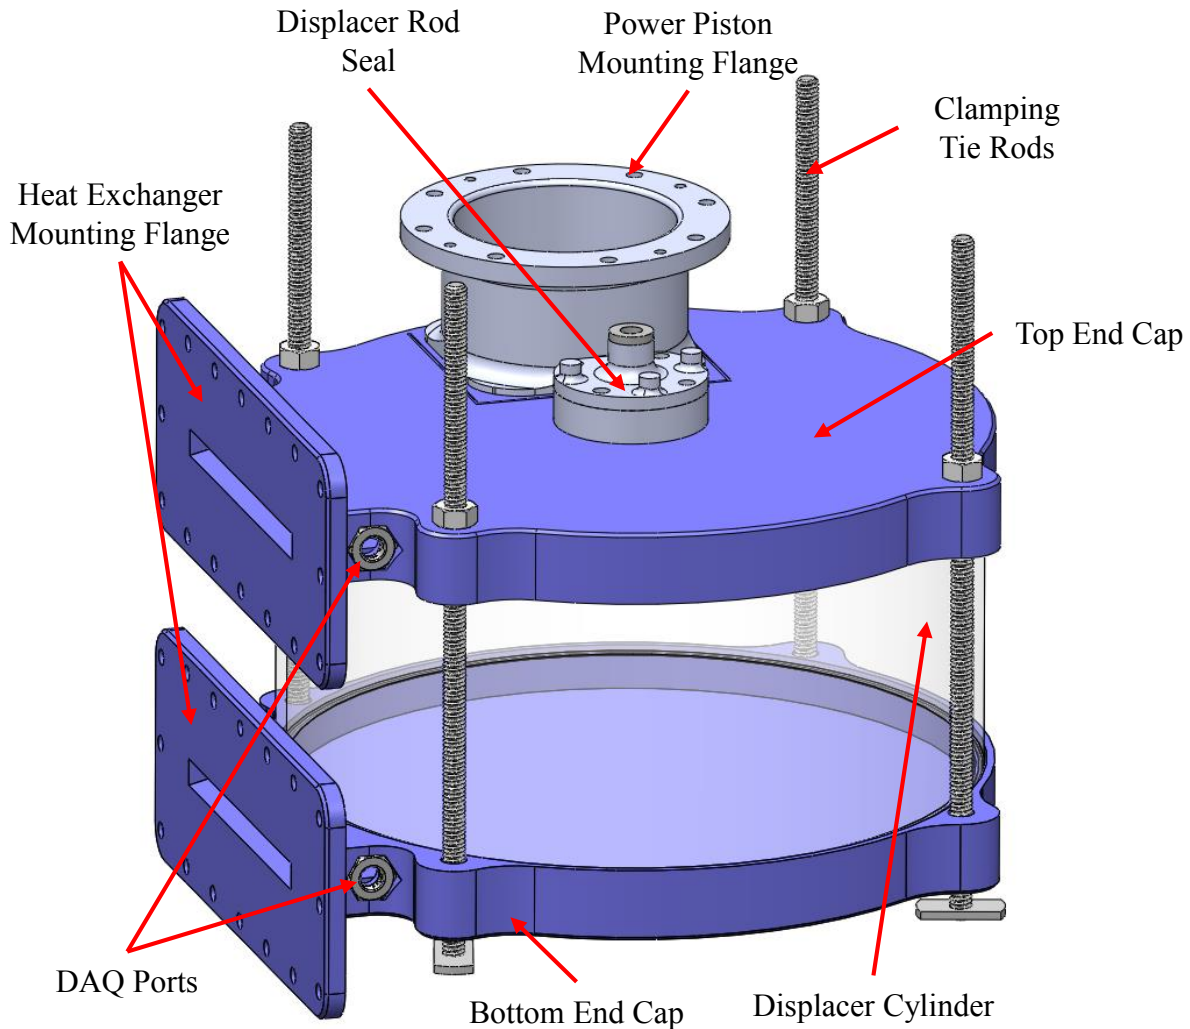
A solid model of how the displacer cylinder and end caps are assembled together.
